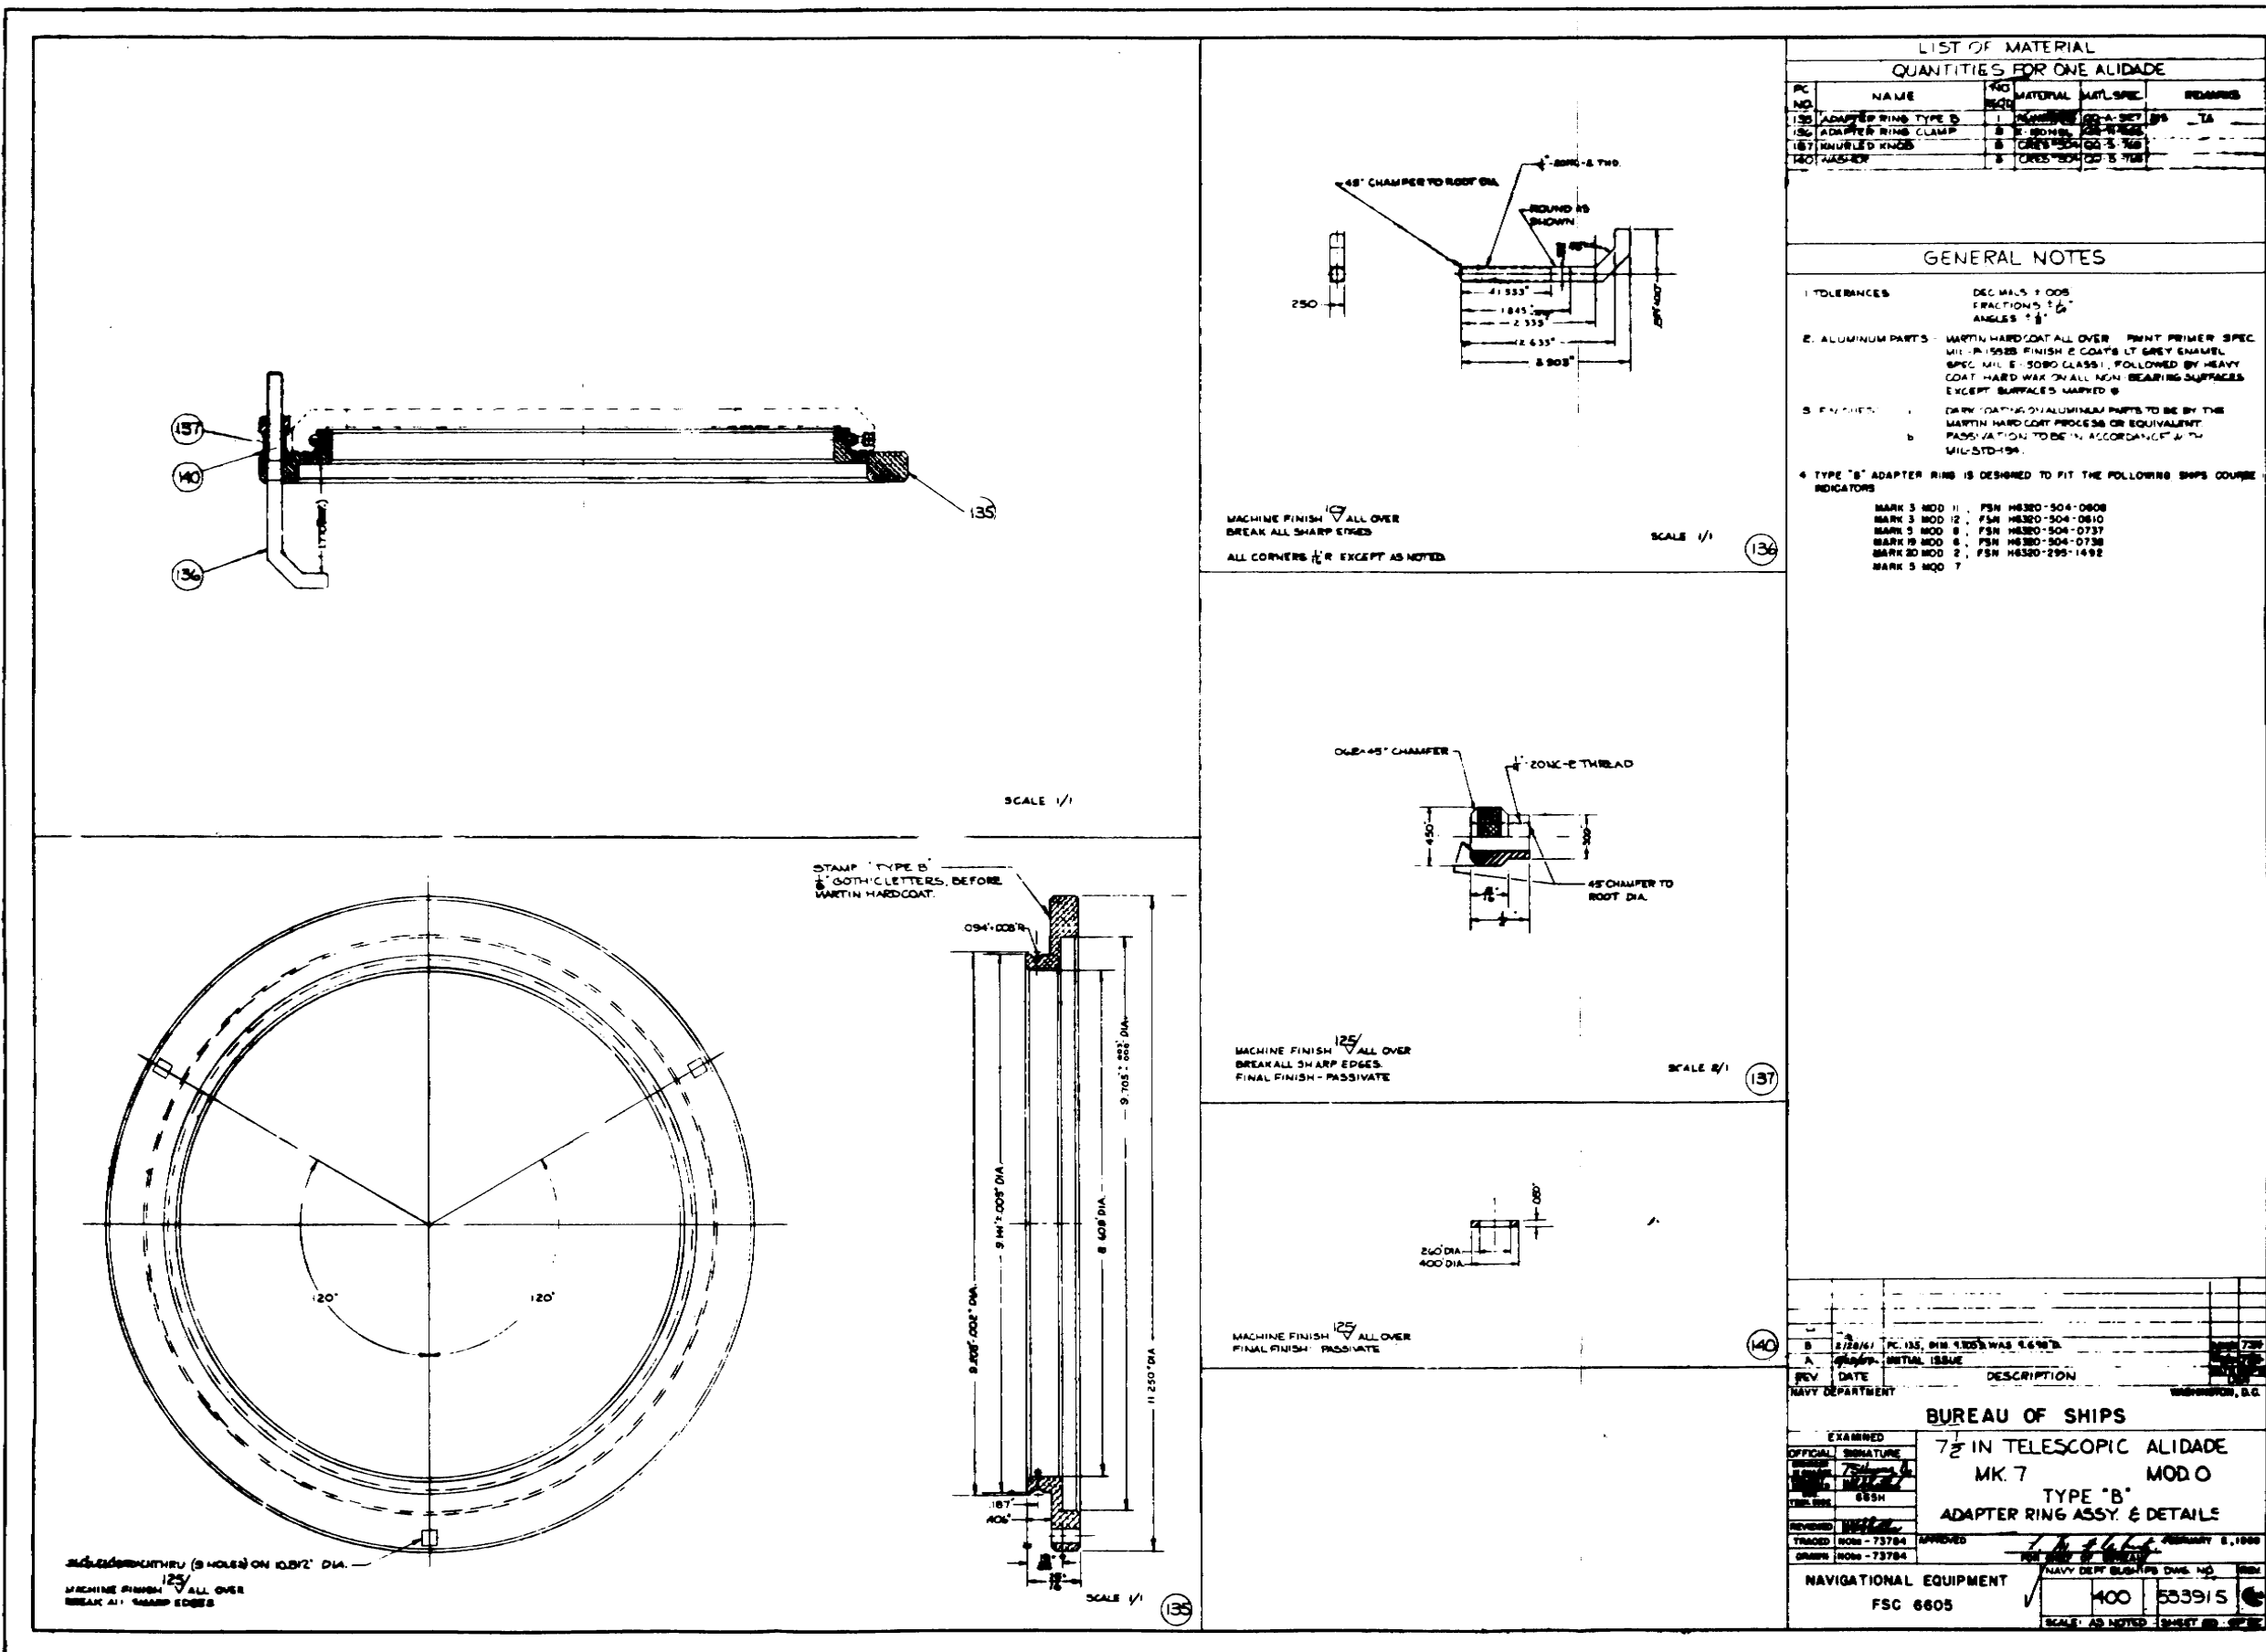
Mark 7 Mod 0 Telescopic Alidade Adapter Ring Assembly and Details Type B 7-9, 7-10
